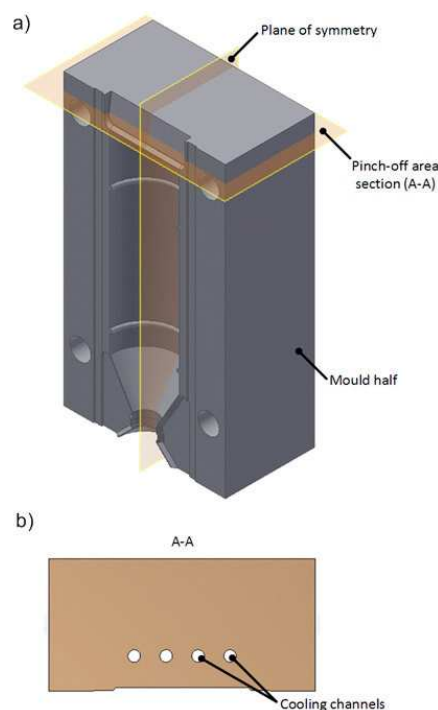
Half of the analyzed extrusion blow mould, a) the view of the mould, b) the cross-section considered in the computer simulation
